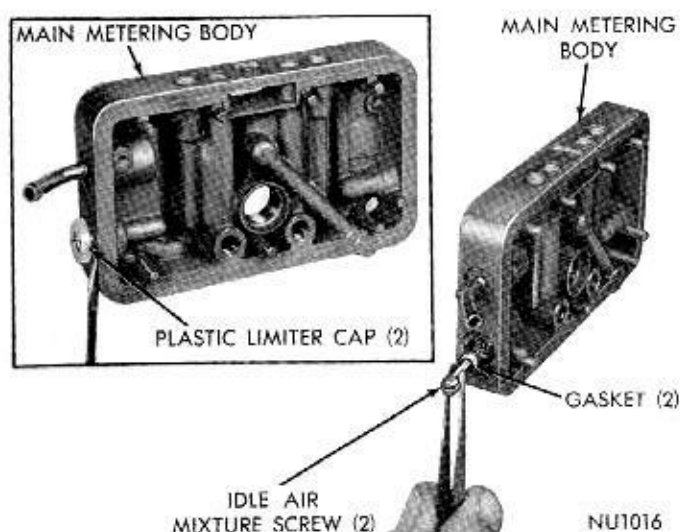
Removing Idle Air Mixture Screws and Gaskets
